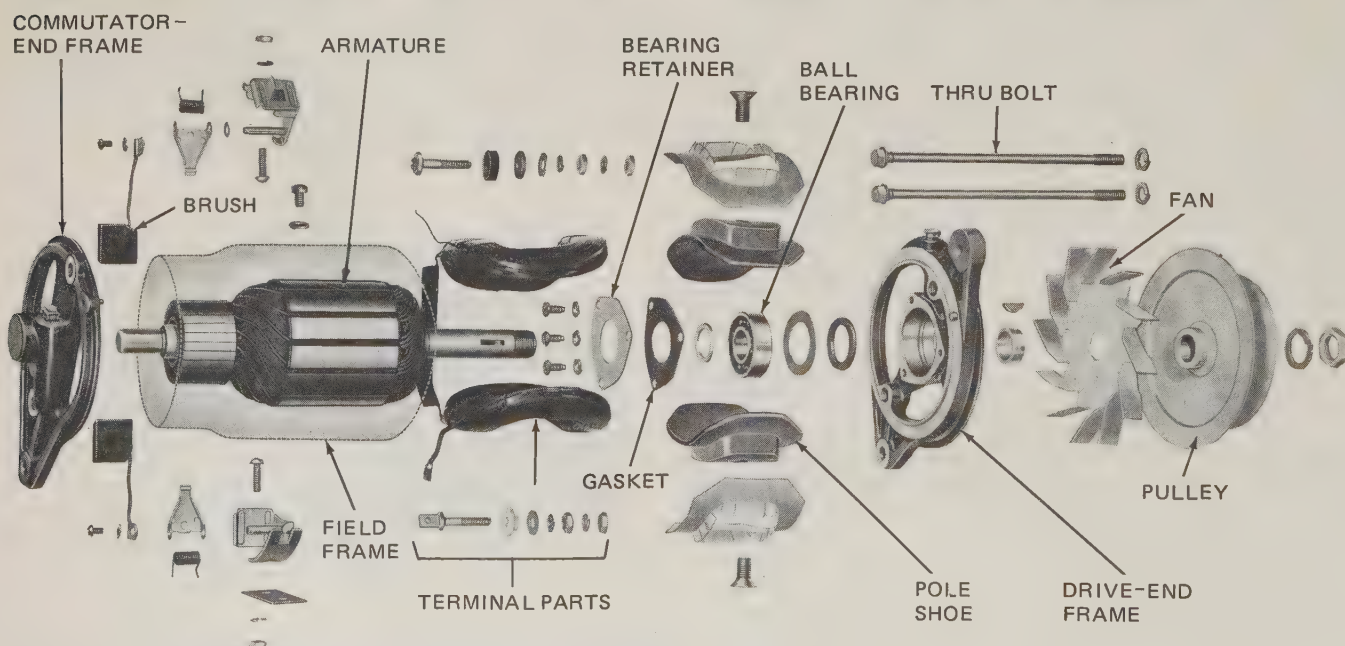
Disassembled view of a typical dc generator. (Delco-Remy Division of General Motors Corporation)
